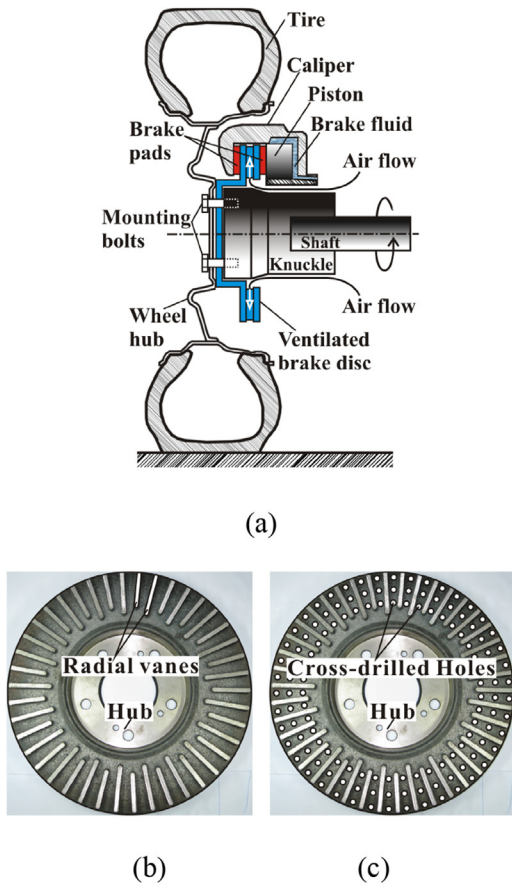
Illustration of a passenger vehicle disc brake system: (a) working principle; (b) standard radial vane brake disc; (c) cross-drilled radial vane brake disc.
